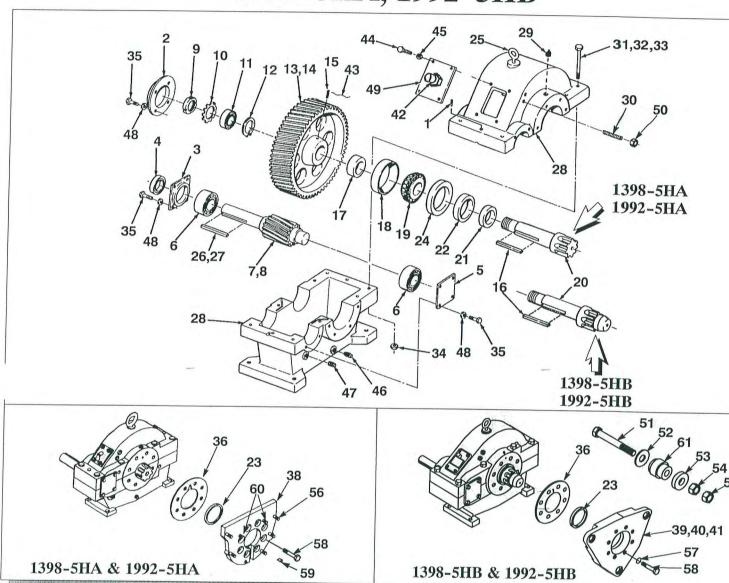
1398-5, 1398-5HA, 1398-5HB, 1992-5HA,1992-5HB Gearbox Exploded View.
